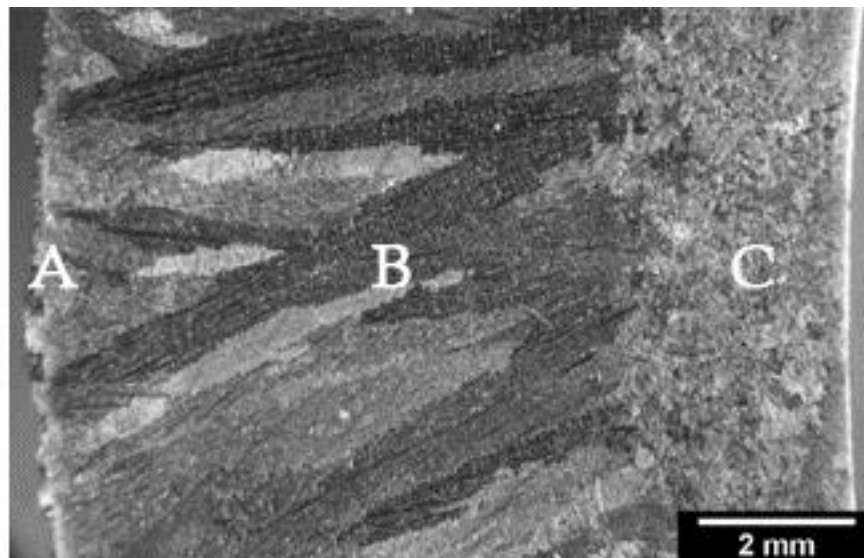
Cross-section of a typical HP alloy tube displaying the macrostructure due to the centrifugal casting method [56].
